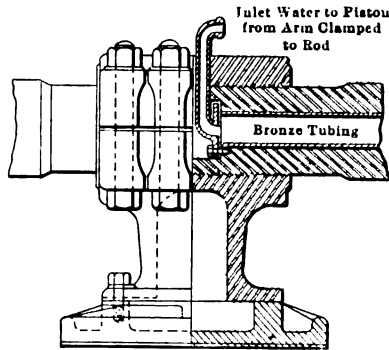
SECTION SHOWING WATER INLET TO PISTON
